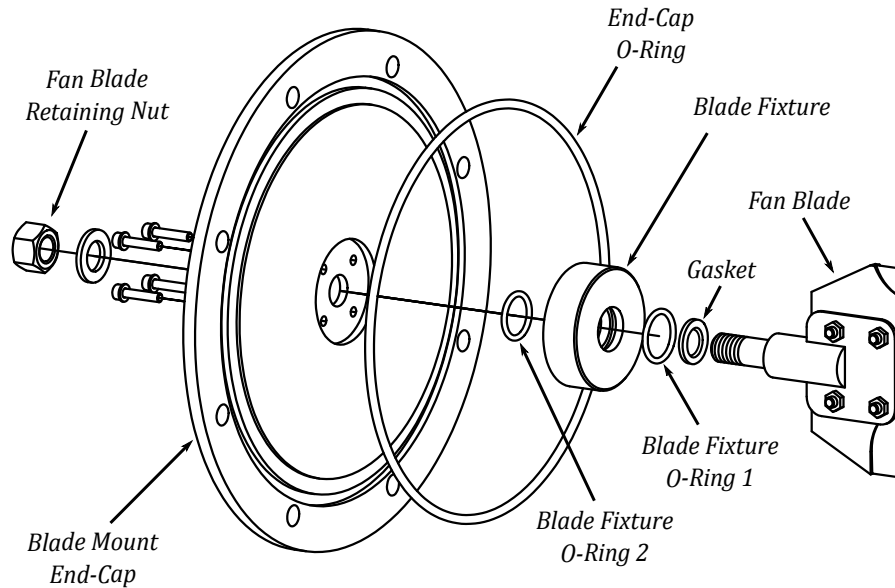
Exploded view of the blade mount end-cap assembly, illustrating the placement of the relevant seals and components.
